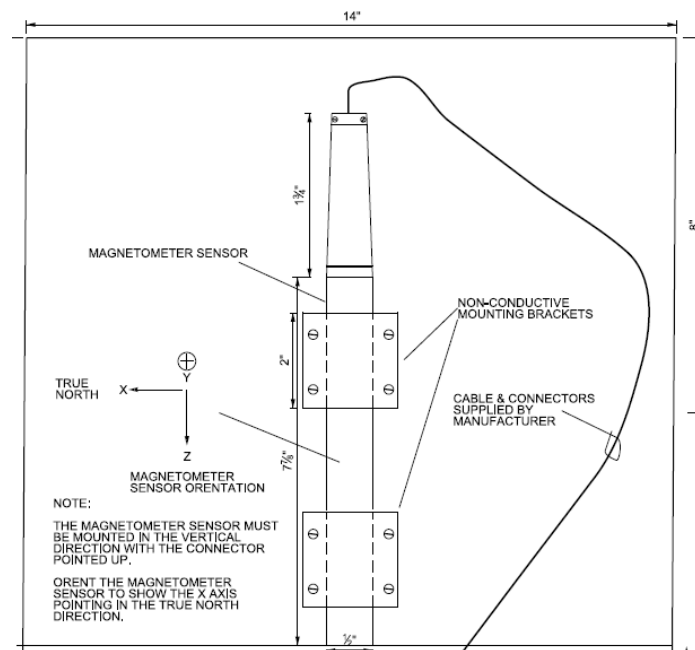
Magnetometer Sensor Enclosure and Installation Assembly
